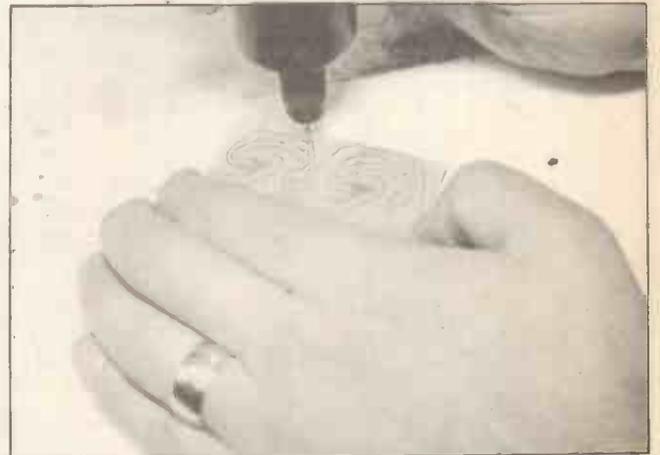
A modeller's drill fitted with a 1 mm bit can be used to drill all component holes.
